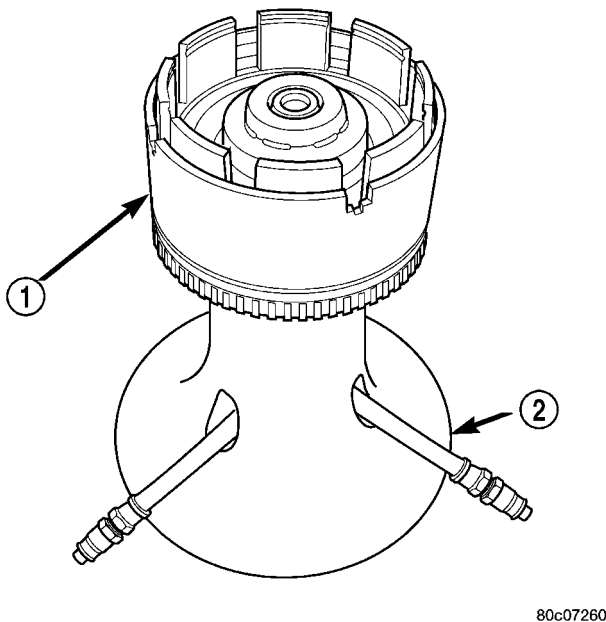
Input Clutch Assembly on Pressure Fixture Tool - 8391
